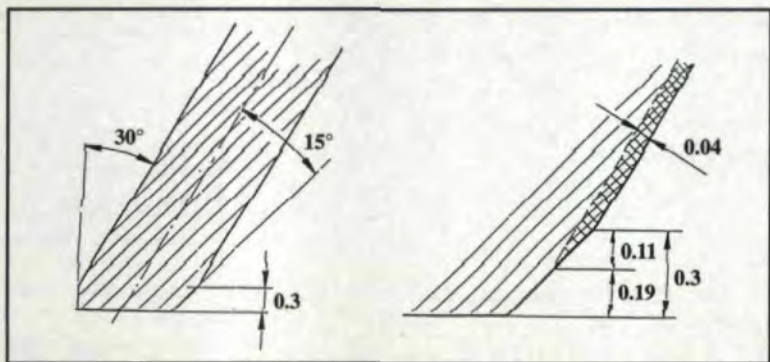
Shaving reduces the size of the chamfer to some extent.
